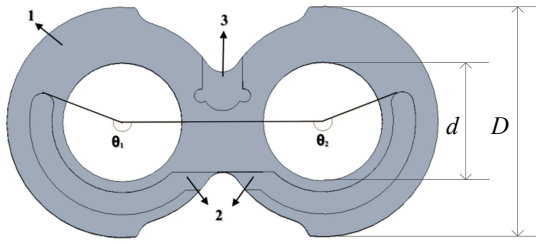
Structure of oil tank: 1) side plate; 2) oil filling groove; 3) unloading groove.
